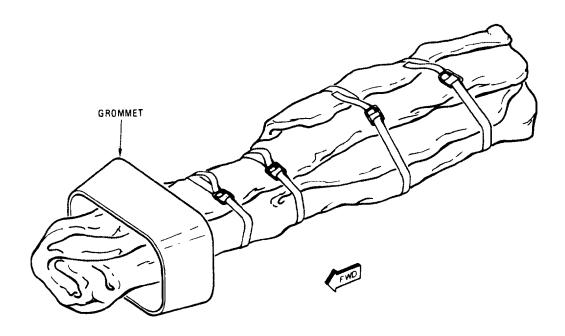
No. 1 Fuel Tank Folding (Sheet 5)
